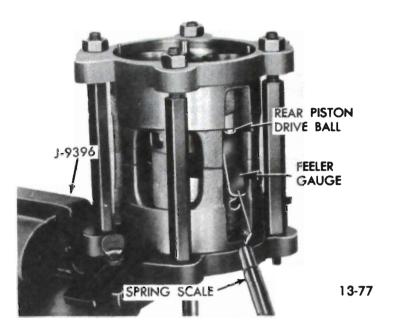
Checking Drag on Selected Feeler Gage Leaf with Spring Scale
